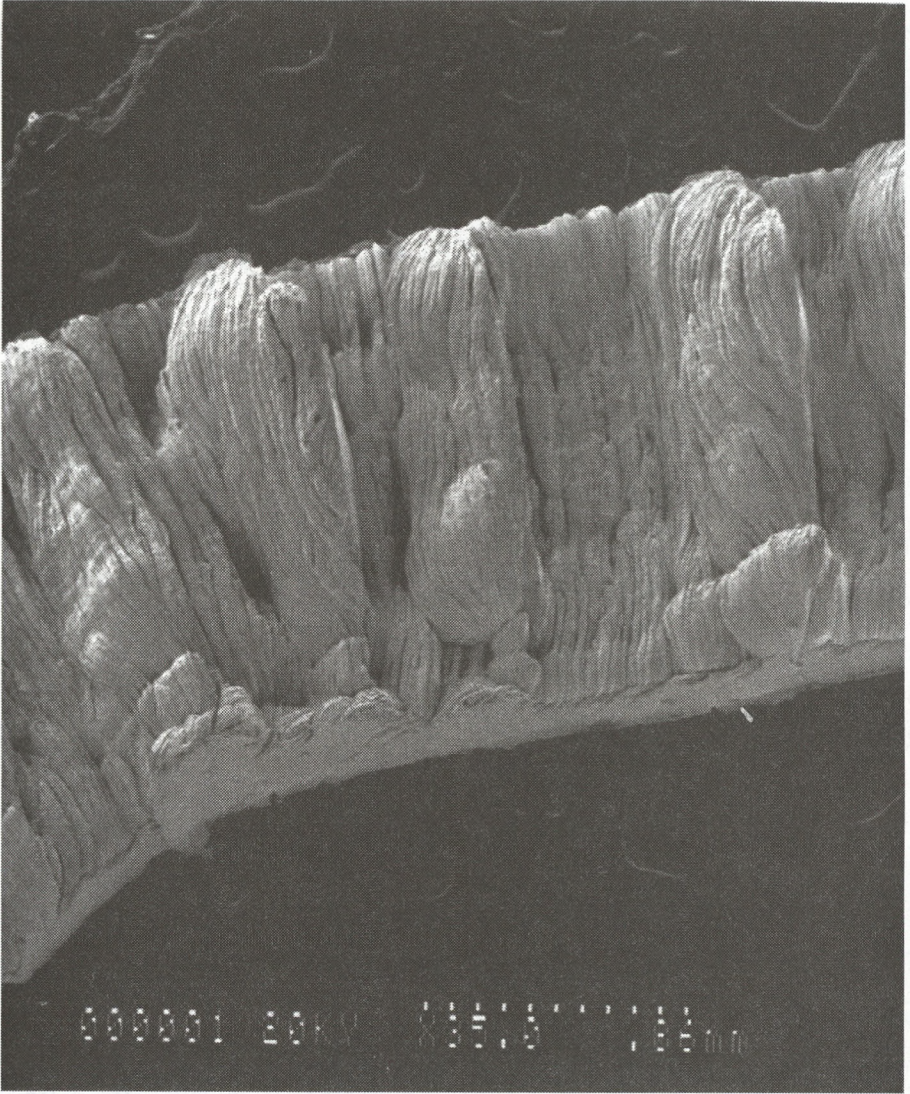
Lathe Swarf surface of machined 95%Pt-5%Ru
